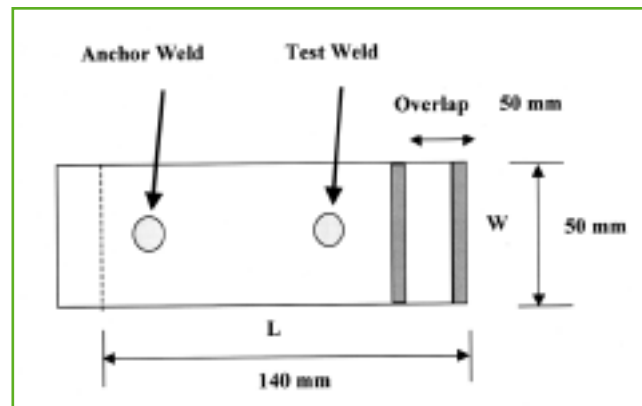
Sketch showing the dimensions of a peel test coupon used to determine welding current ranges.
